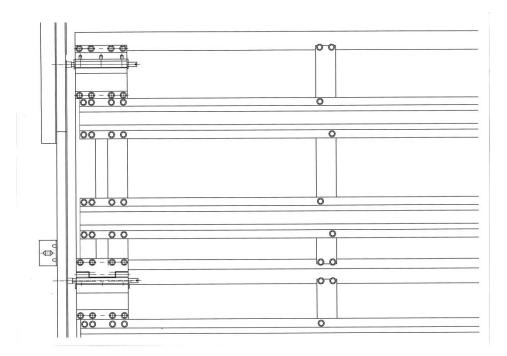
Top Bracket & Strut Fixing Positions (Top Panel shown)
